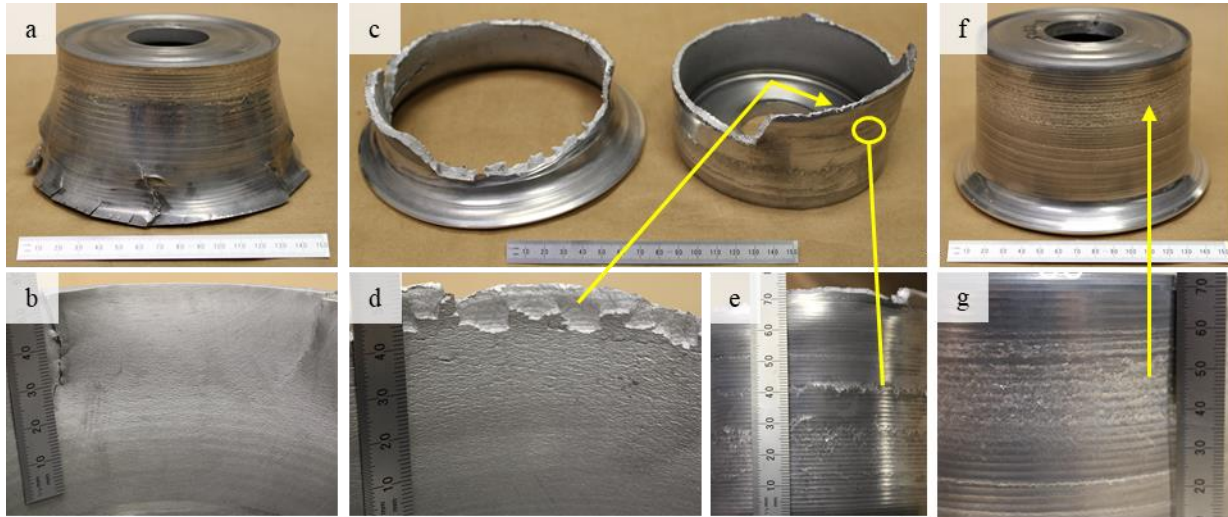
Spin forming results of Al 5083. (a) Failed part showing premature axial cracking emanating from the waterjet-cut edge. (b) IML of the part in (a) showing orange peel and axial tears. (c) Failed Al 5083 part exhibiting (d) orange peel, microcracks, and beachmarks on the IML and (e) circumferential cracks on the OML. (f) Al 5083 part successfully spin formed due to intermediate anneals, with (g) lapping and flaking on the OML.
